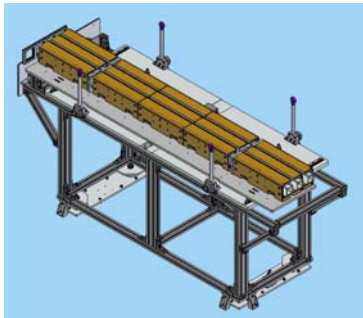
Schematic drawing of one frame with a table and mounted optics.
